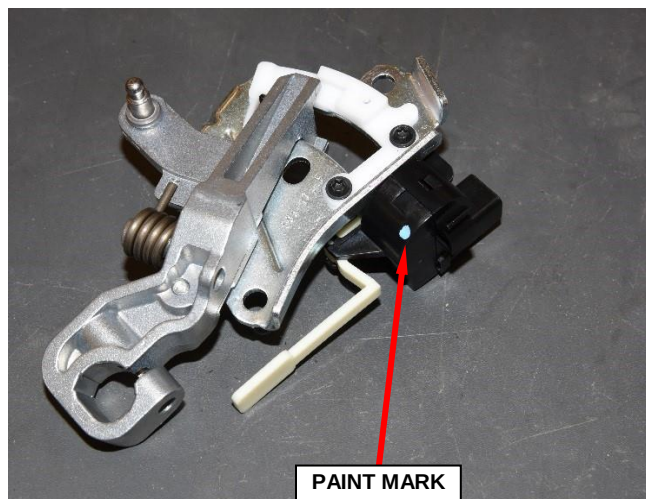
Gearshift Bracket / BTSI Assembly Paint Mark Verification
